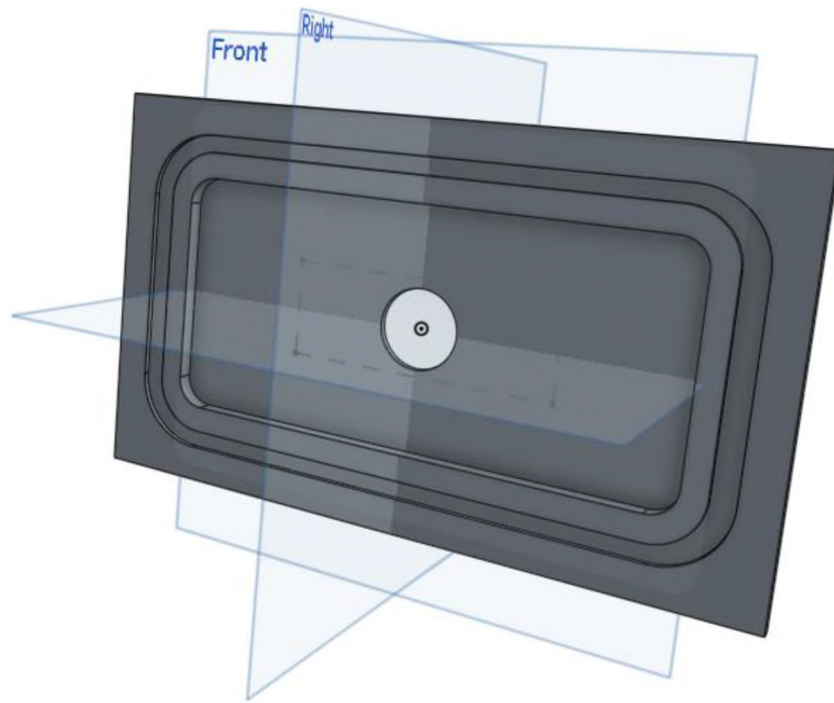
3D CAD drawing of the printed trough using the online CAD program Onshape.
